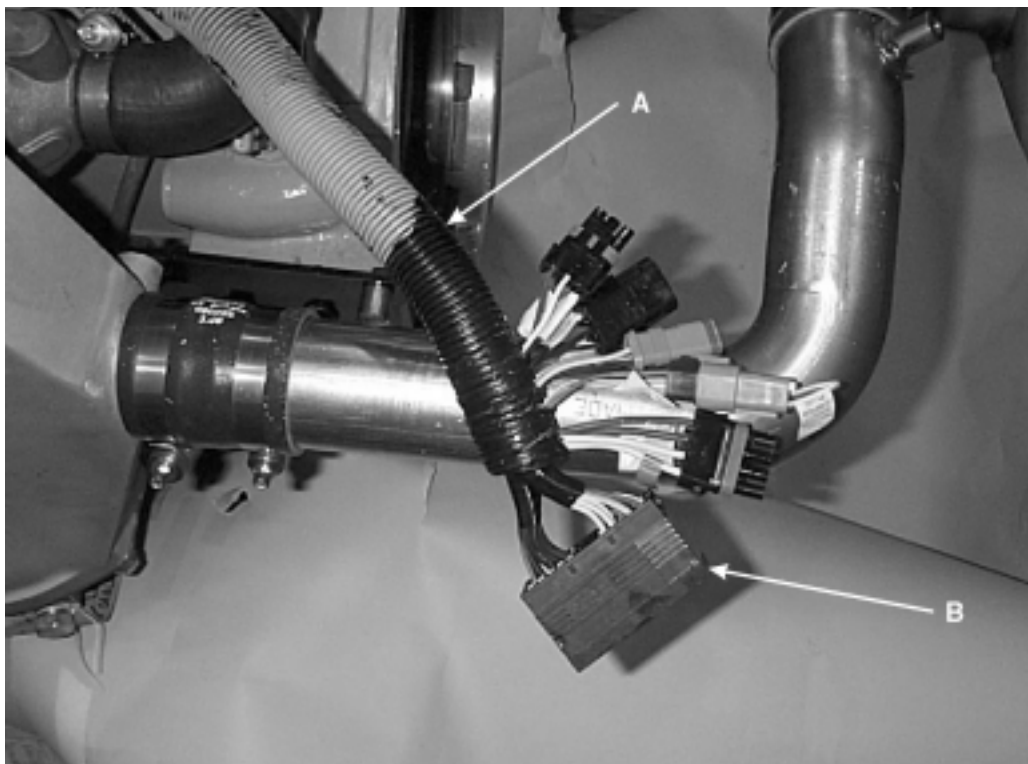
Engine Power Harness and Remote 40-Pin Connector
